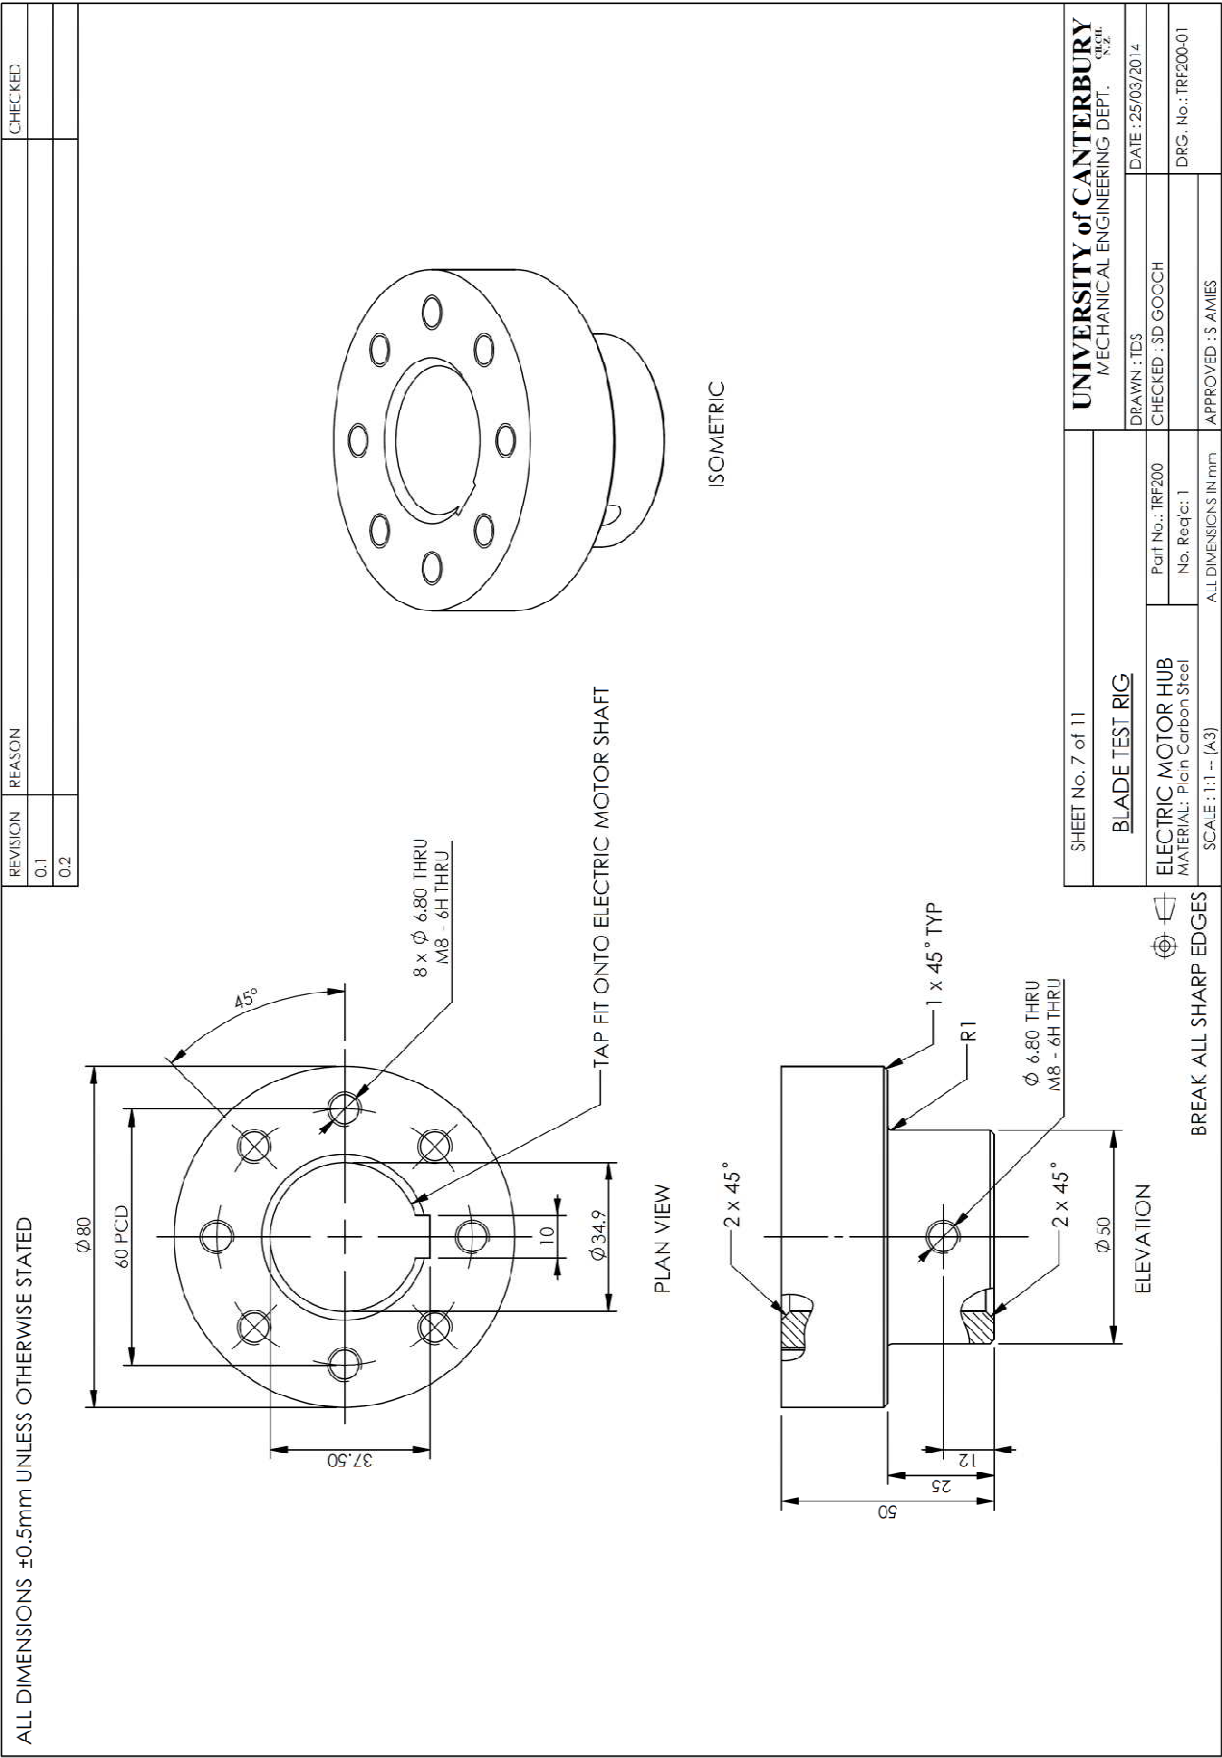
Manufacturing drawing of electric motor drive hub in fatigue test rig.
